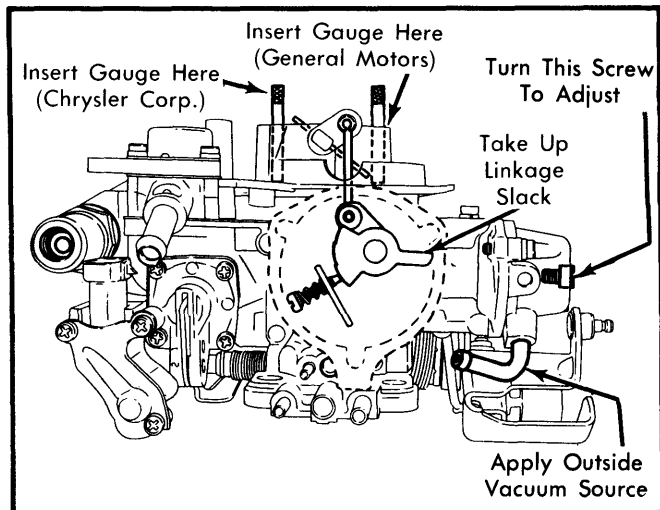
Adjusting Choke Vacuum Break (Initial Choke Valve Clearance)
